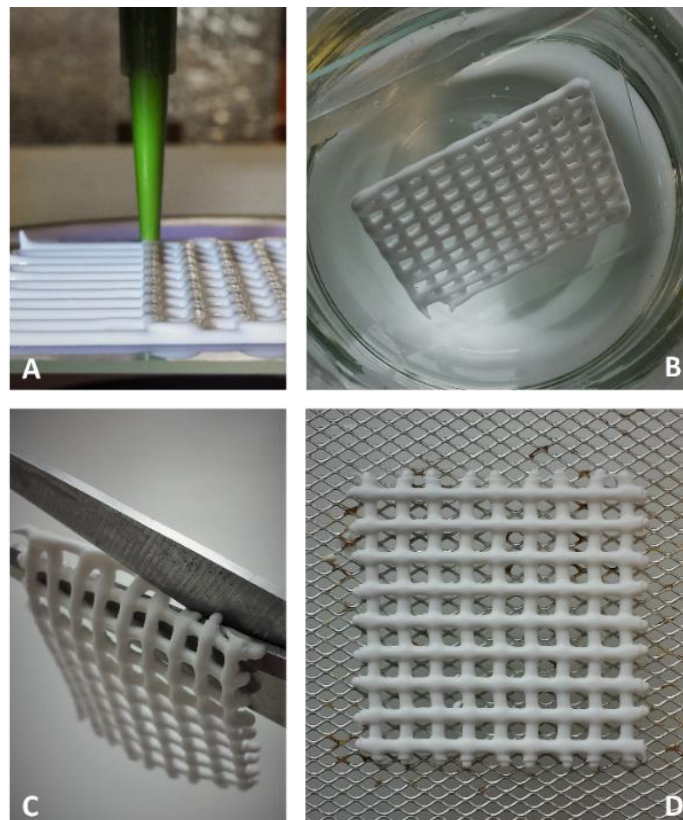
Fabrication steps for planar hollow-tube lattices: robocasting (A), cross-linking (B), trimming (C), infrared heating on aluminium mesh (D).
